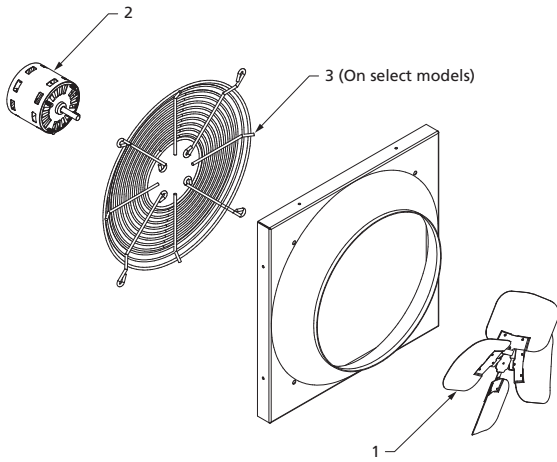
Repair Parts Illustration for Quiet-Design and Commercial Fans
